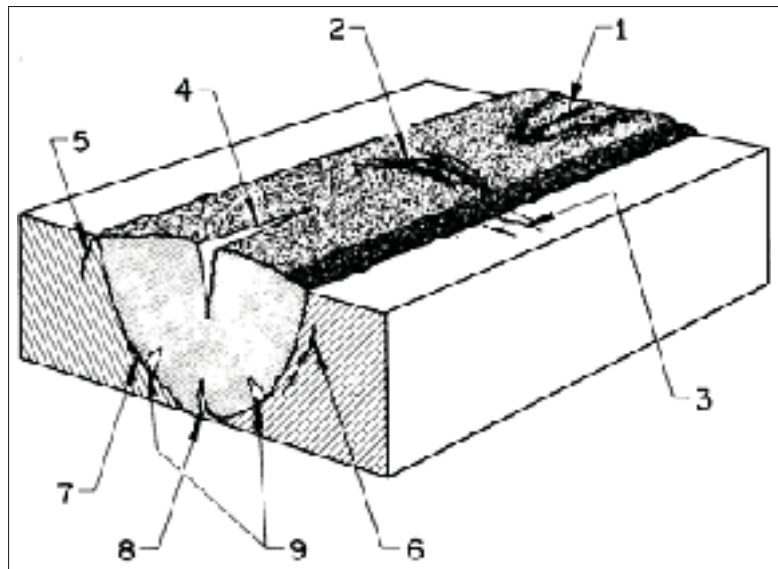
Crack types which may be found in a weld joint. 1) is a crater crack in weld metal; 2), transverse crack in weld metal; 3) transverse crack in HAZ; 4) longitudinal crack in weld metal; 5) toe crack in base metal; 6) underbead crack in base metal; 7) fusion-line crack; 8) root crack in weld metal; 9, hat cracks in weld metal.
